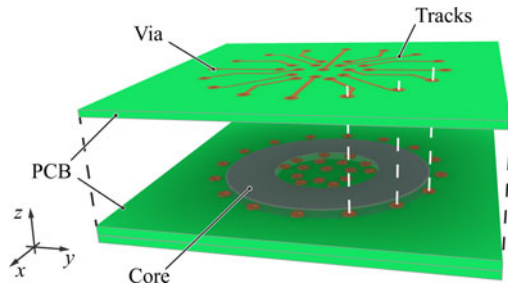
PCB-integrated core; windings are realized with PCB tracks and vias.
